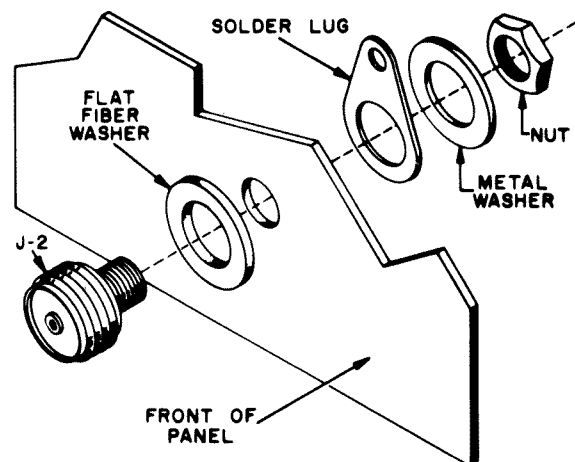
HOW TO MOUNT THE CHASSIS CONNECTOR
